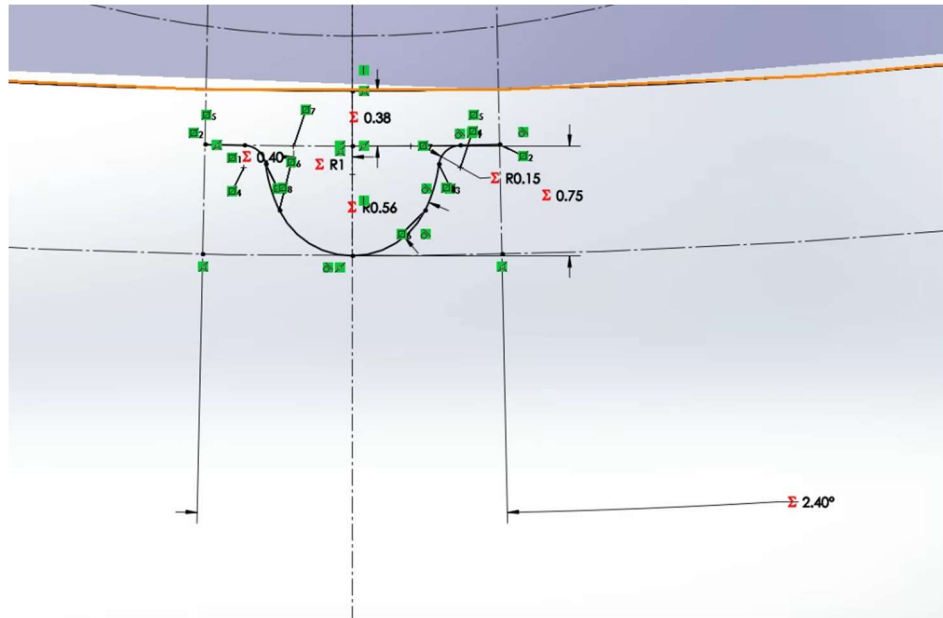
Defining the belt profile of the wheel to reference dimensions in a future sketch
